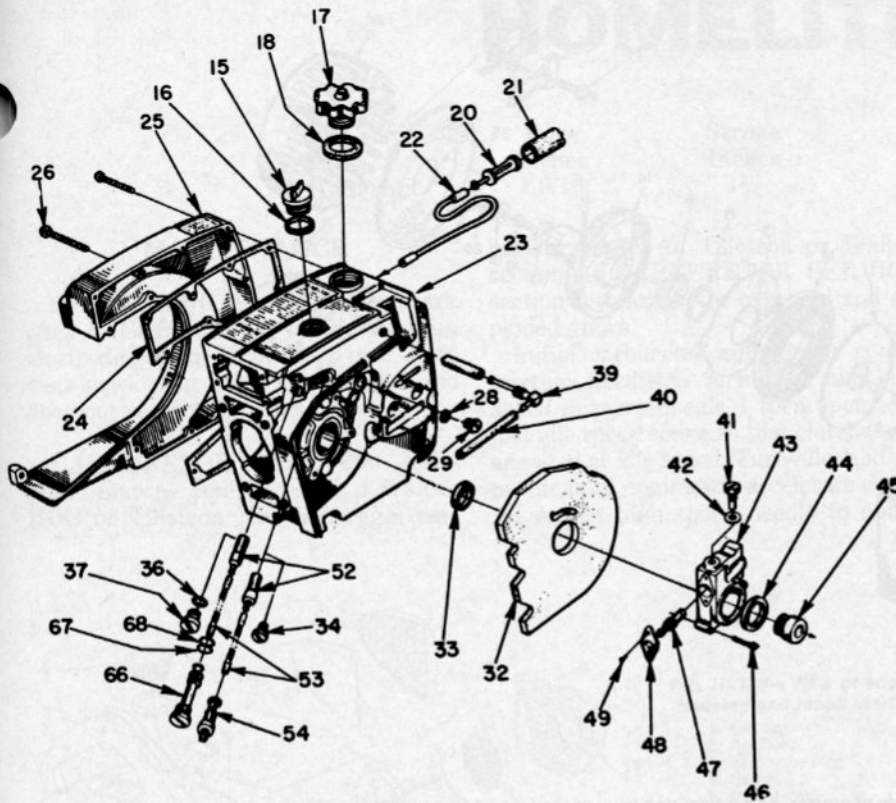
Exploded view showing automatic chain oiler pump, manual and automatic oil pick-ups, crankcase and oil reservoir and fuel tank. Automatic oil pump plunger (47) and pump body (43) are available as a matched set only. Plug (34) is used to seal opening when saw is not equipped with manual chain oiler; plug (37) and washer (36) are used on models not equipped with automatic chain oiler.
